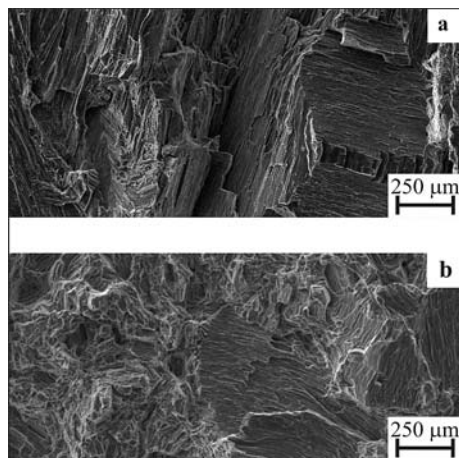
Fracture surfaces of the as-cast (a) and extruded (b) magnesium after tensile tests.
